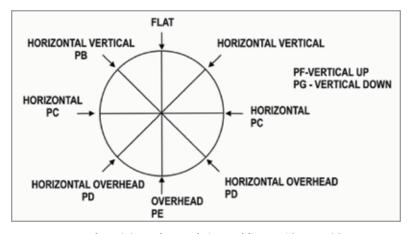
Plate and Pipe Welding Positions to ISO
